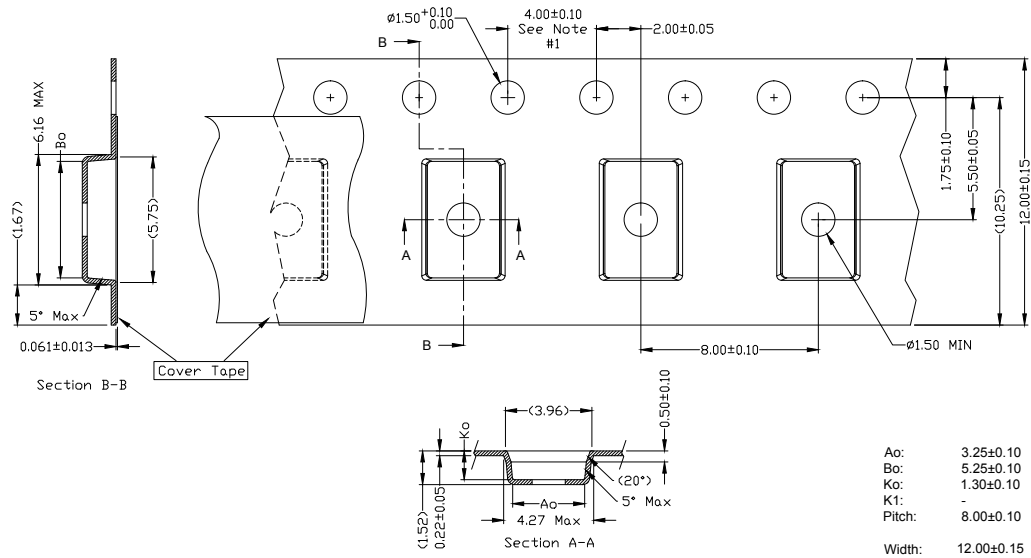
Pocket tape dimensions for LUXEON Altilon SMD 1x4.
